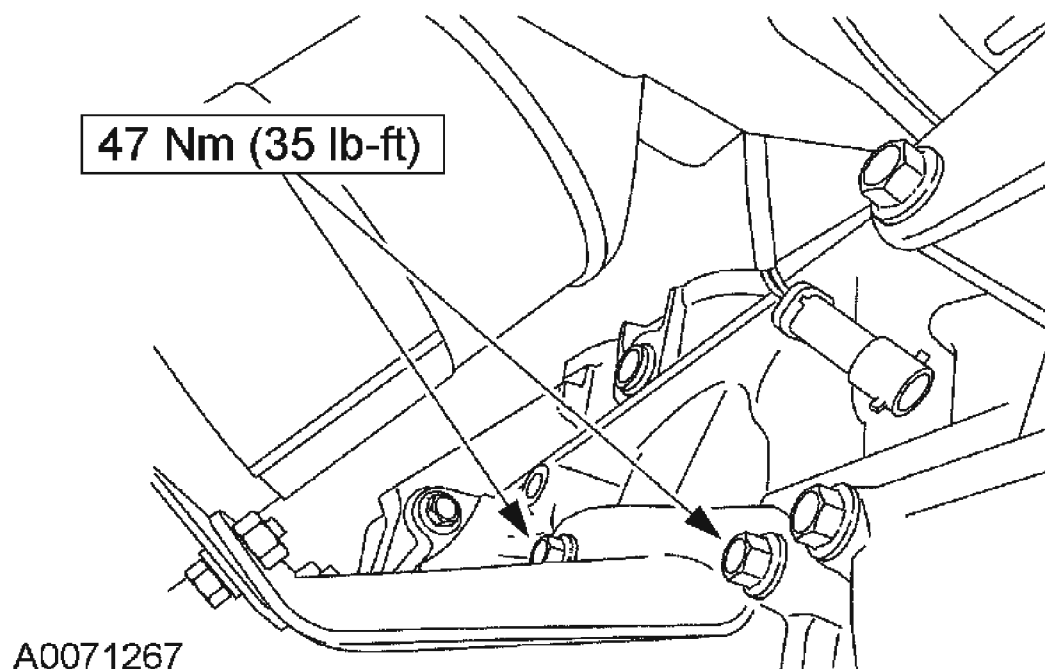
Removing 2 Catalytic Converter-To-Engine Bracket Bolts
